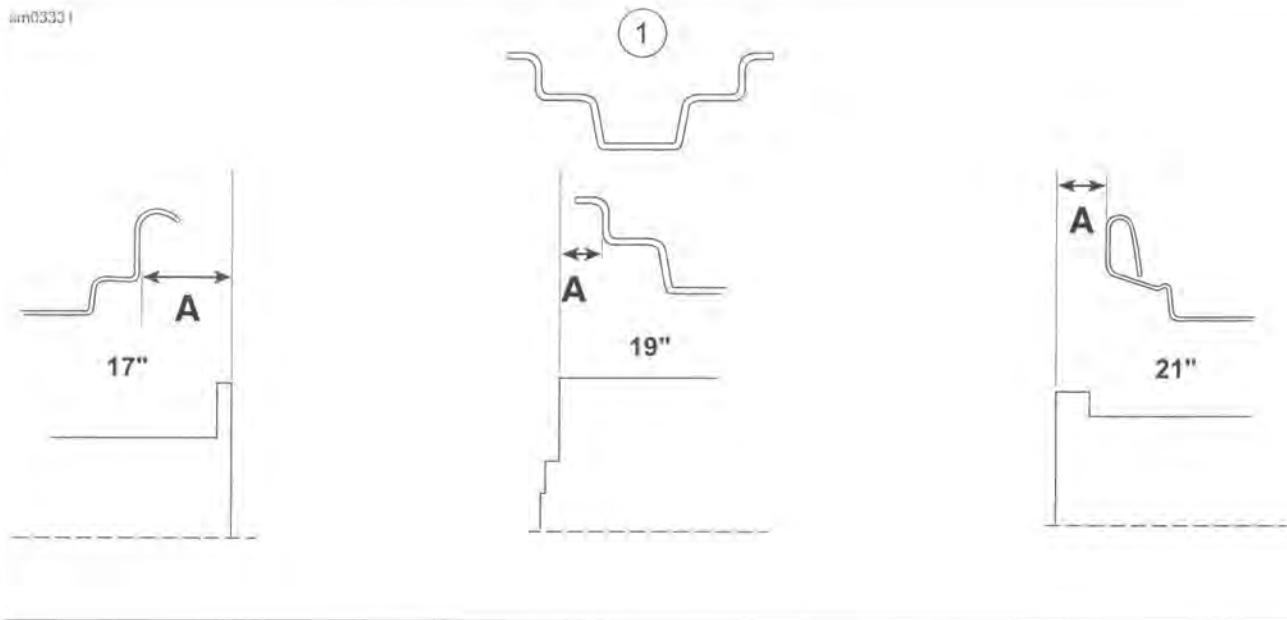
Checking Wheel Hub Offset Dimension (Typical)
